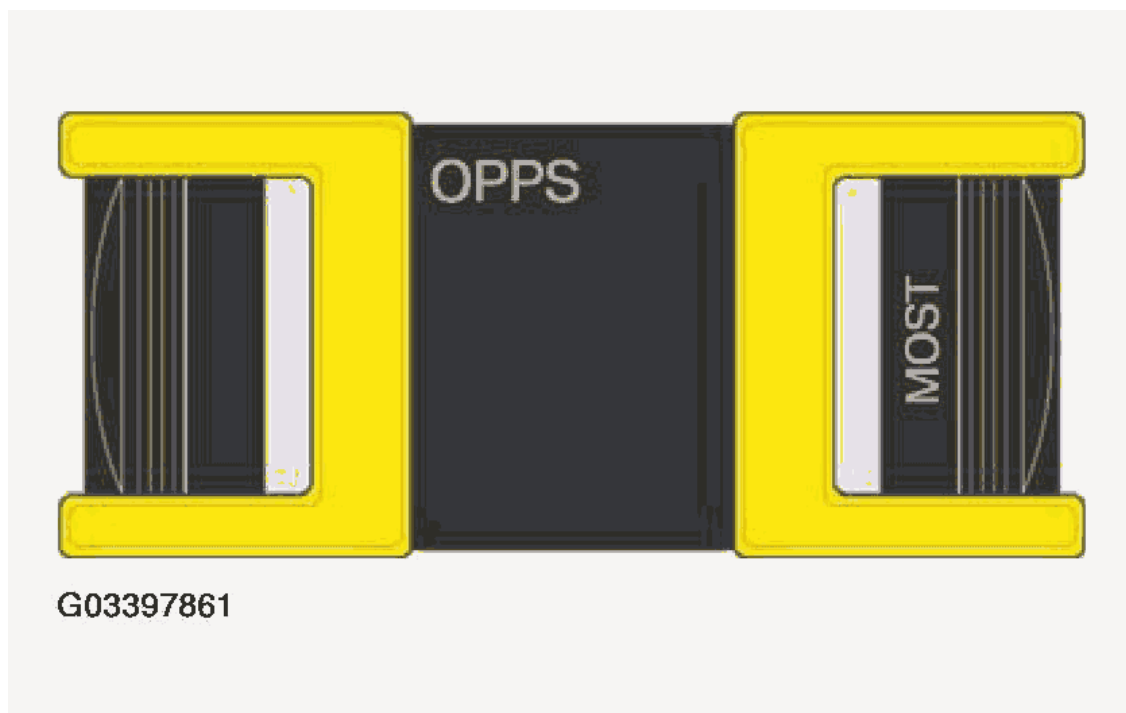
Identifying OPSS Head - (Optical Testing & Programming System)
